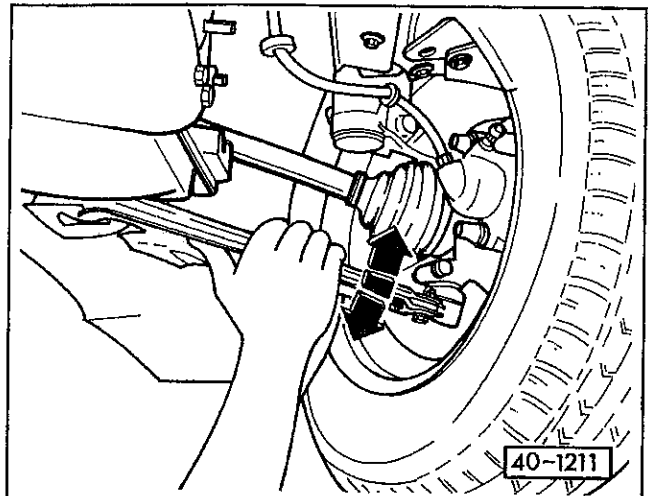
Ball joint axial play being checked. Push/pull control arm (arrows) to check for play.
